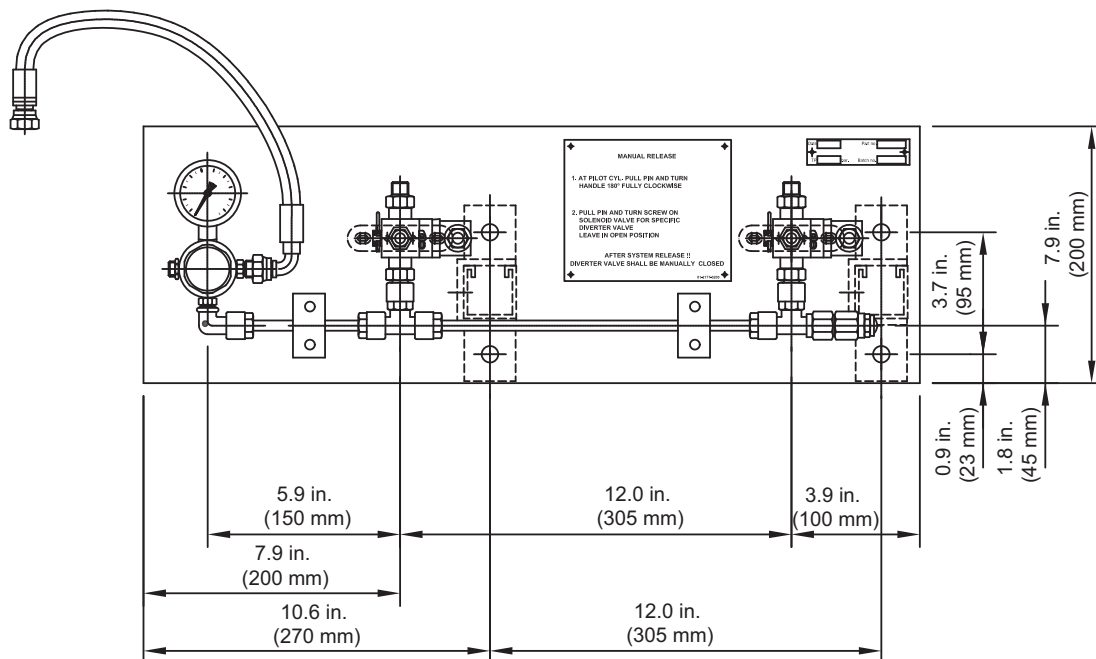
Back-Plate Manifold Dimensions (2 Area Manifold shown)
